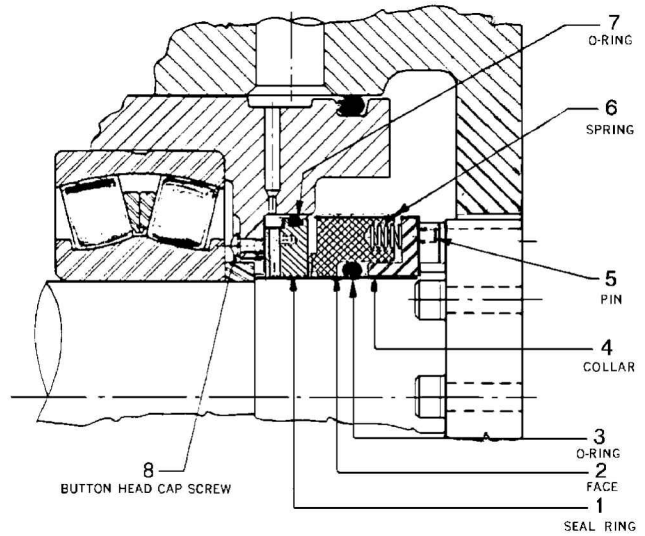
MECHANICAL SEAL INSTALLATION
